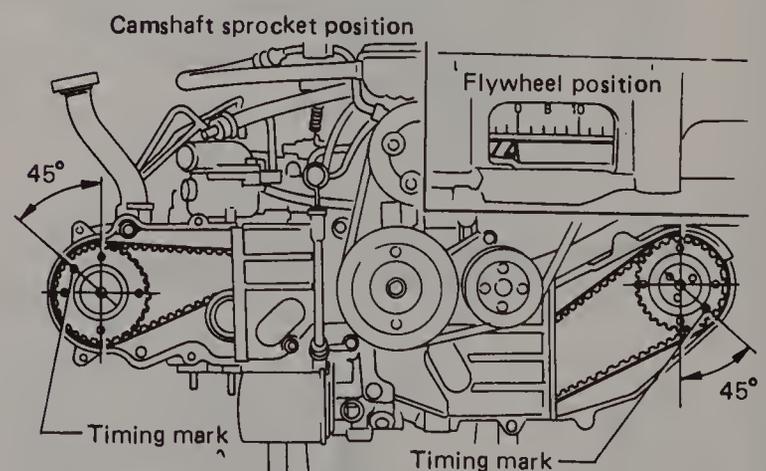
Position the camshaft sprockets as shown here before installing the distributor (Sec 5)
